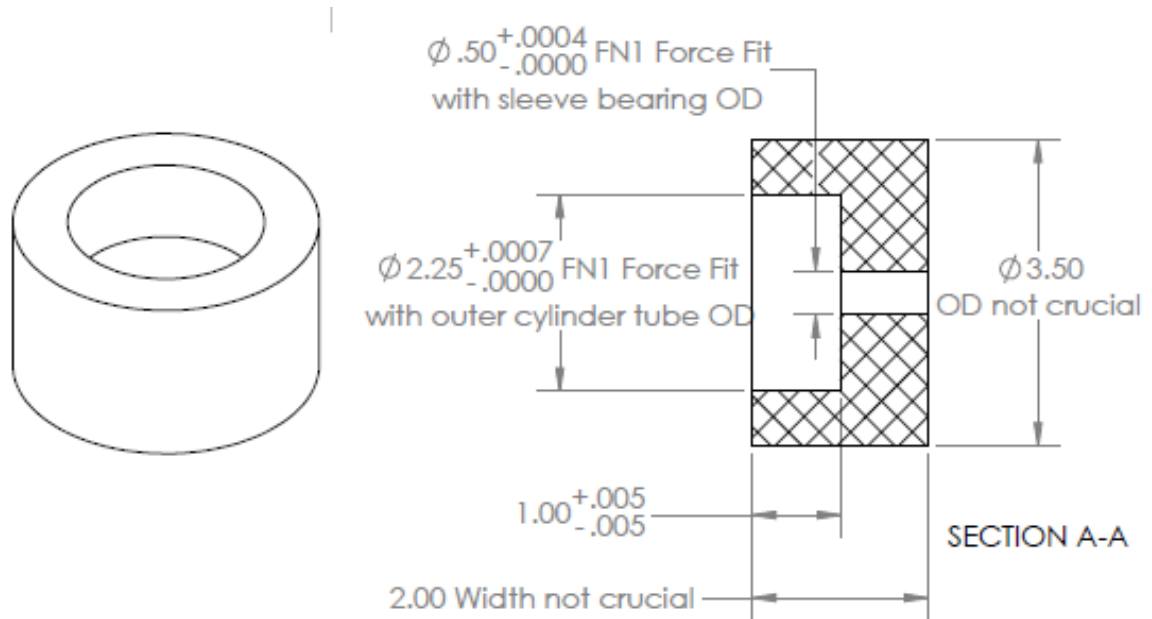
The base fixture supports the assembly of concentric cylinders of the Couette Cell, as well as insulating the outer surface of the heat exchanger. The hole at the base of the fixture houses a sleeve bearing, which aligns the shaft of motor with the inner cylinder. This support is machined from a rod of PTFE.
